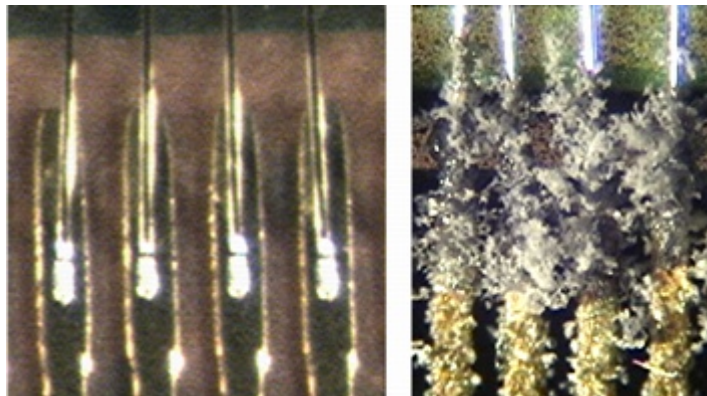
On the left, pristine wire bonds with feet on PCB pads. On the right, the same after chlorine corrosive attack.
